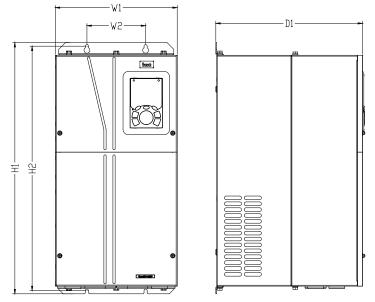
Wall installation diagram of VFDs of 220V 18.5–55kW and 460V 37–55kW
